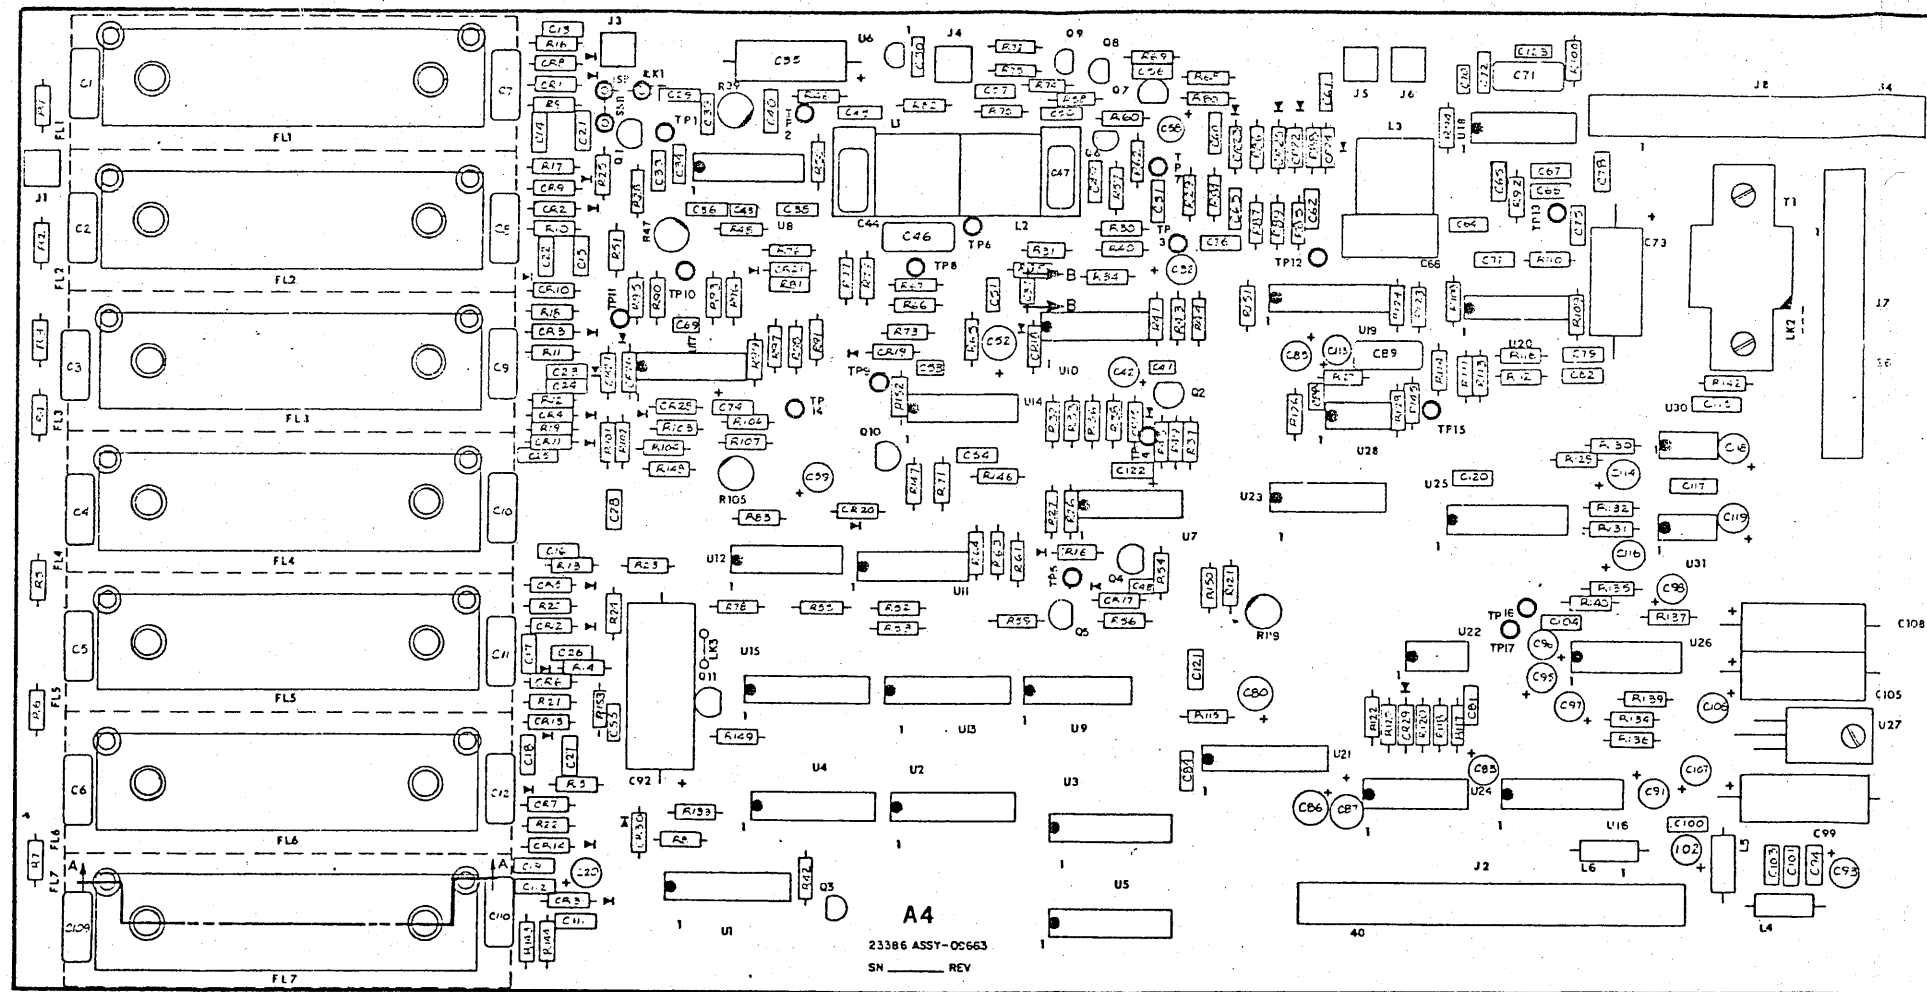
Main IF/AF Circuit Card Assembly (A4)
